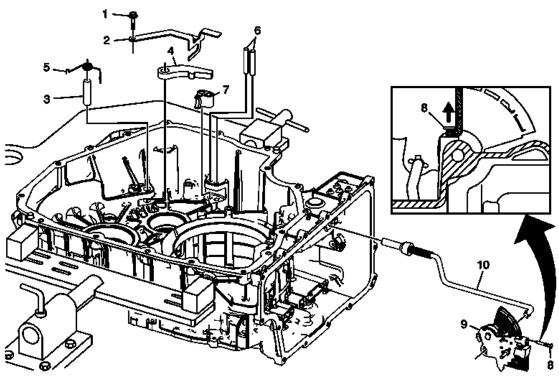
Identifying Manual Shift Detent Lever With Shaft Position Switch Assembly & Park Pawl Actuator Courtesy of GENERAL MOTORS COMPANY
